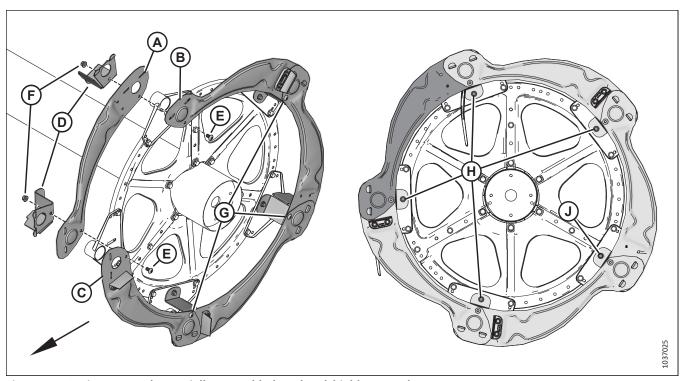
Five-Bat Reel – Partially Assembled Reel Endshields on Reel
